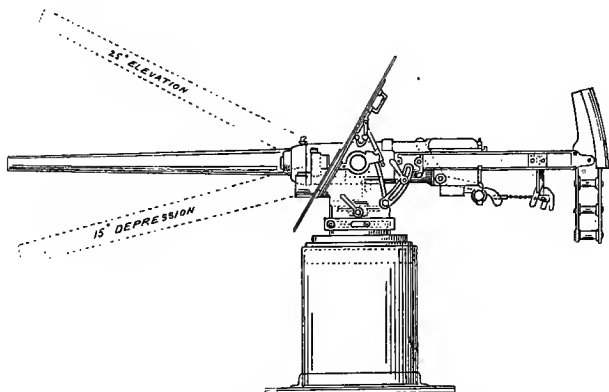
6-POUNDER HOTCHKISS QUICK-FIRING GUN ON ELSWICK AUTOMATIC RECOIL MOUNTING.
